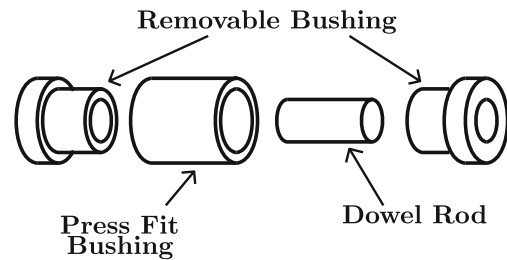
A four piece mold comprised of three drill bushings and a dowel rod. Internal surfaces were ground to prevent the cast material from adhering to the inside. The mold produces a tube which can later be cut into thin annular specimens
